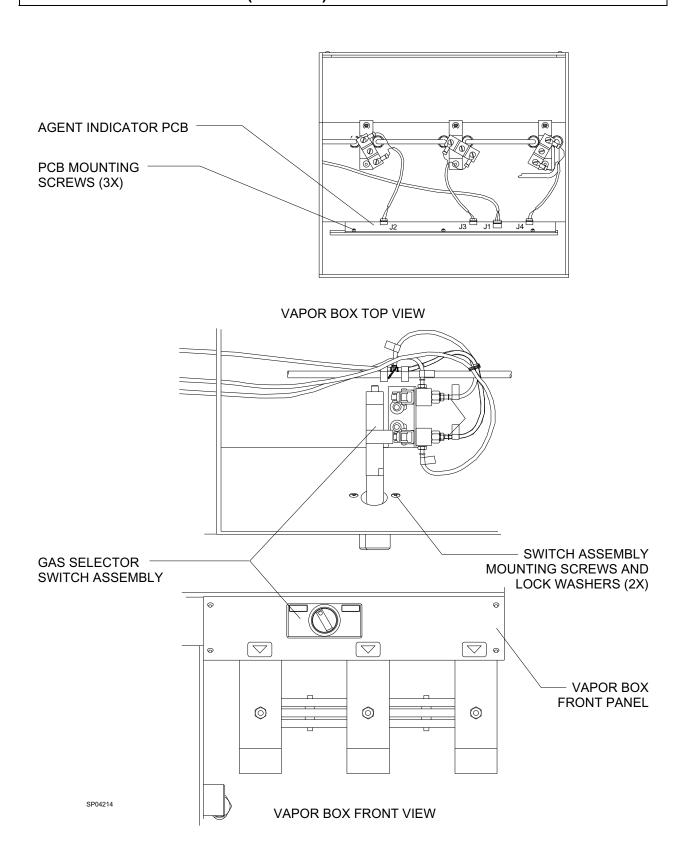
GAS SELECTOR SWITCH AND AGENT INDICATOR LAMP PCB ASSEMBLY
